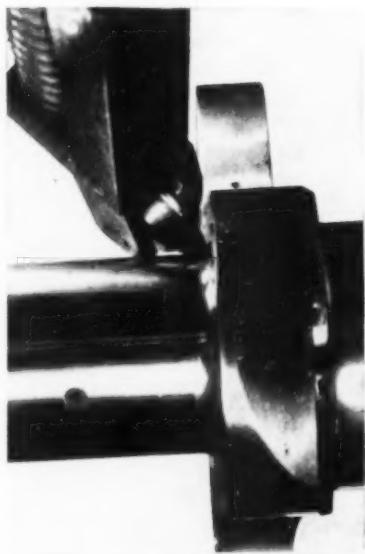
Typical Plain Roller Tool Mounted in a Lathe and Spring Loaded to Apply Force to the Crankshaft Fillet Over Which It Travels (Research Laboratories Div., General Motors Corp.)
